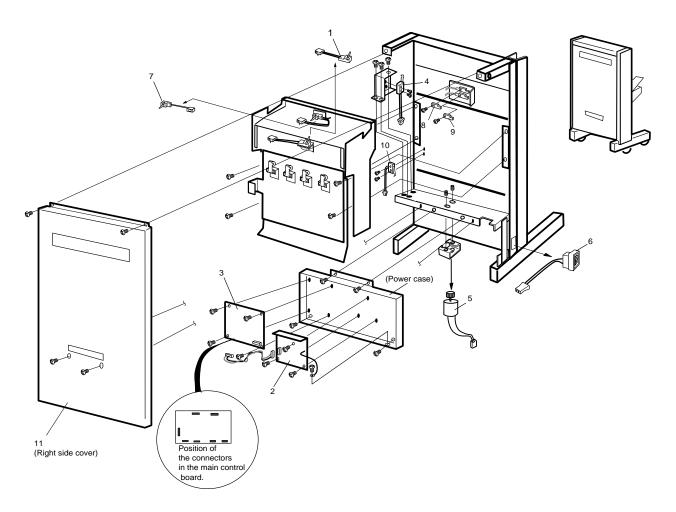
LCOS Input-Paper Transport Assembly Parts Locational Diagram
